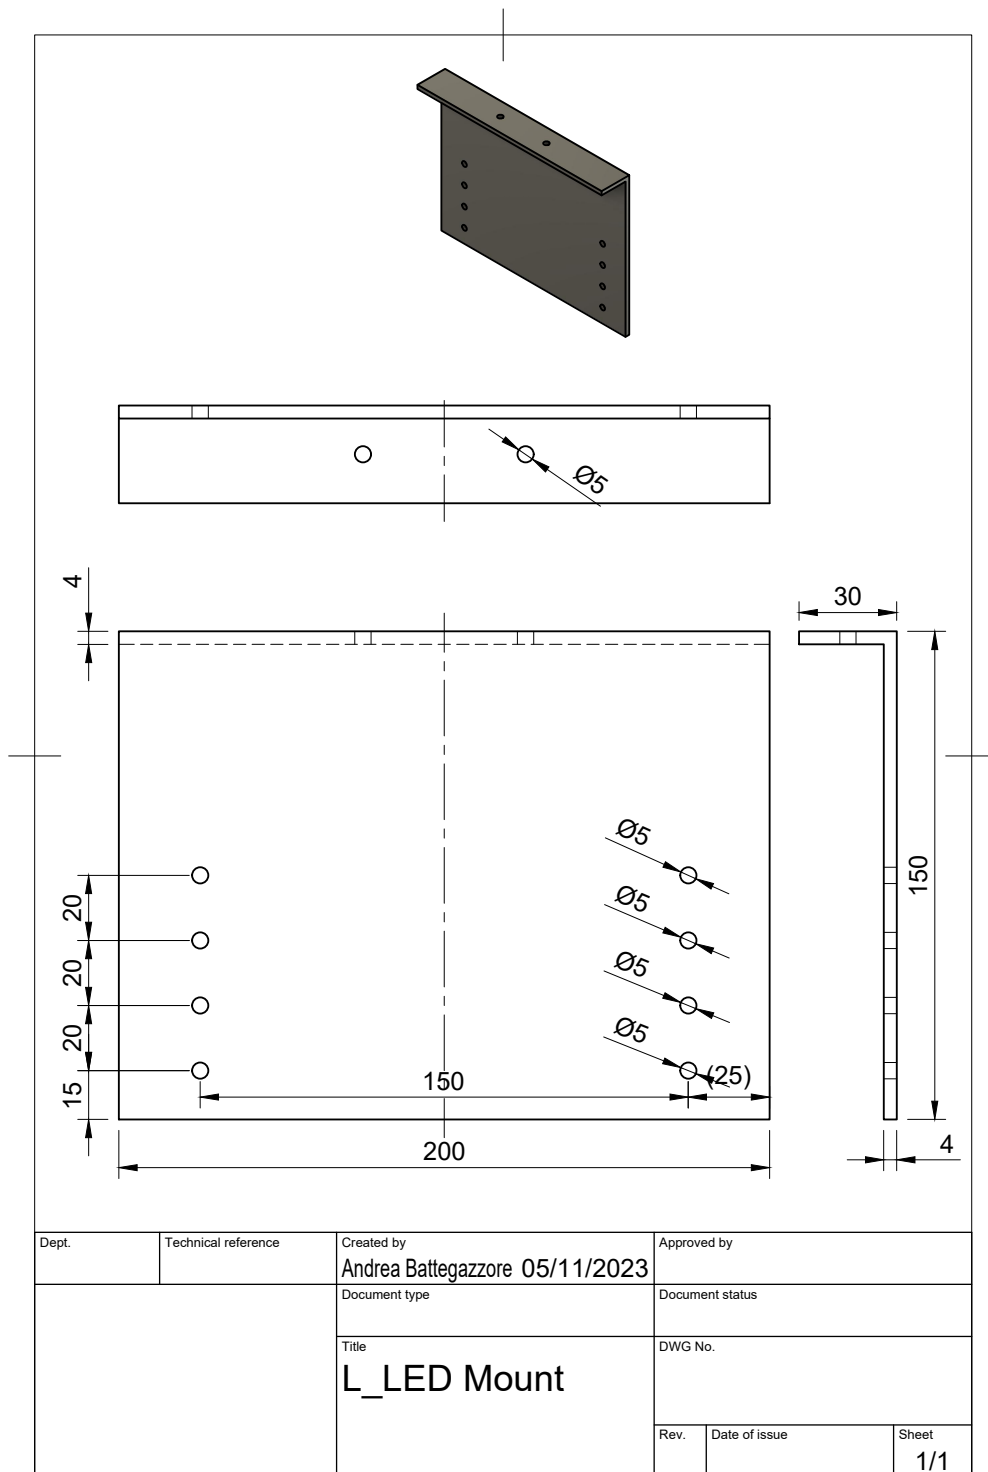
Technical drawing of the custom steel LED mount used for part manufacturing
